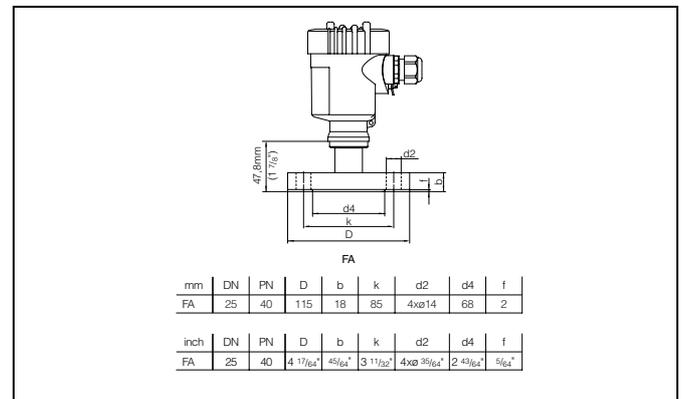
VEGABAR, flange connection form B1, EN 1092-1
